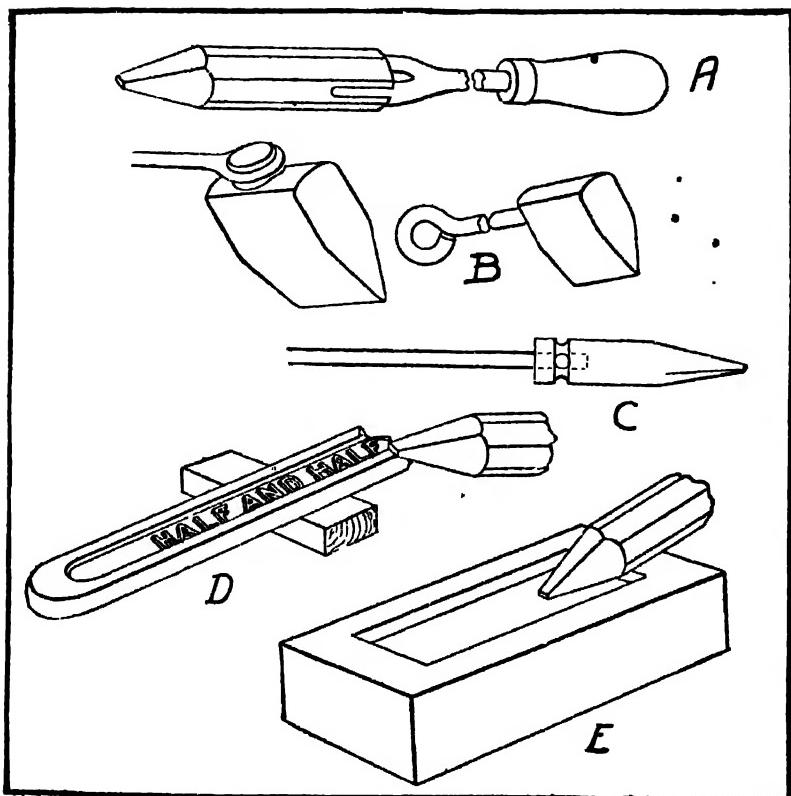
Forms of Soldering Coppers and How to Tin Them.
